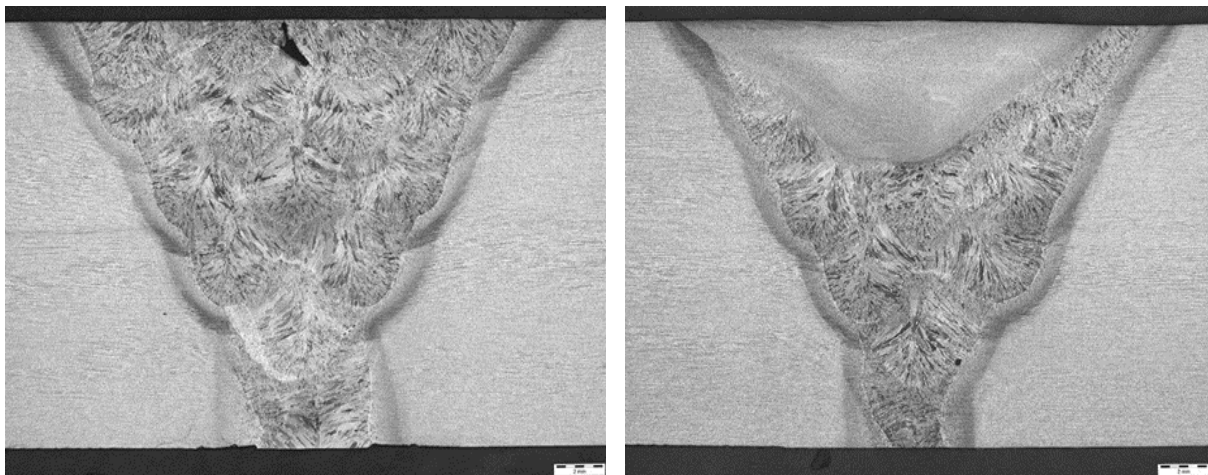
Left: a multi-pass fusion weld made in 20mm thick carbon steel. Right: the same weld with the cap re-processed by a friction stir welding pass.
